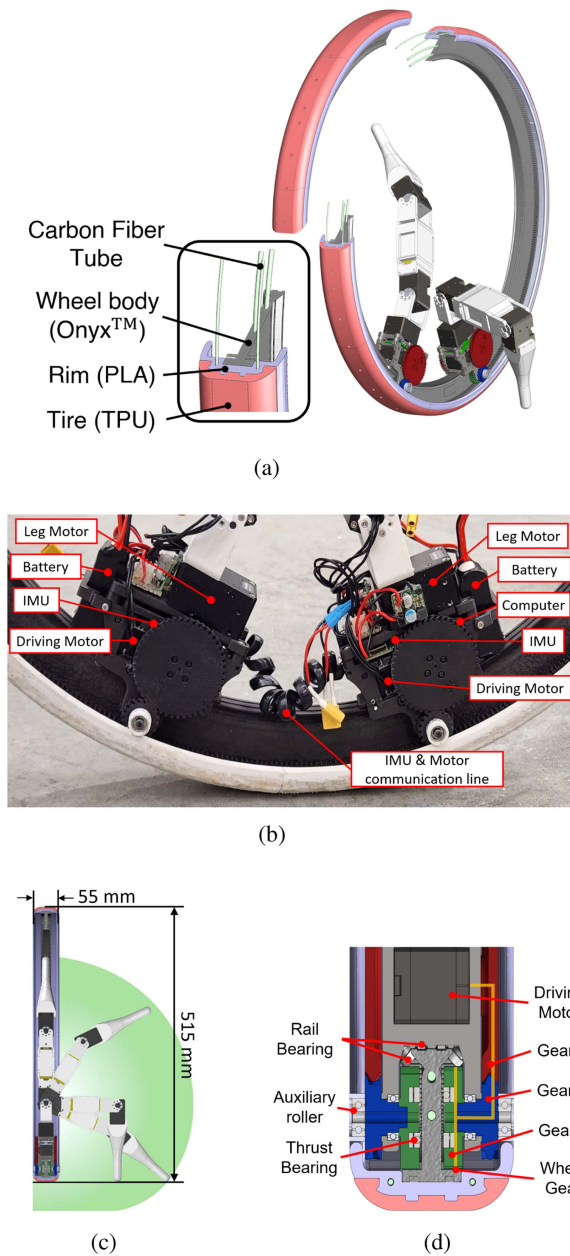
Details of the Ringbot hardware. (a) Ringbot hardware prototype CAD model. (b) Close-up view of two driving modules. (c) Leg workspace in the frontal plane. (d) Cross-sectional view of a driving module and the gear transmission.
